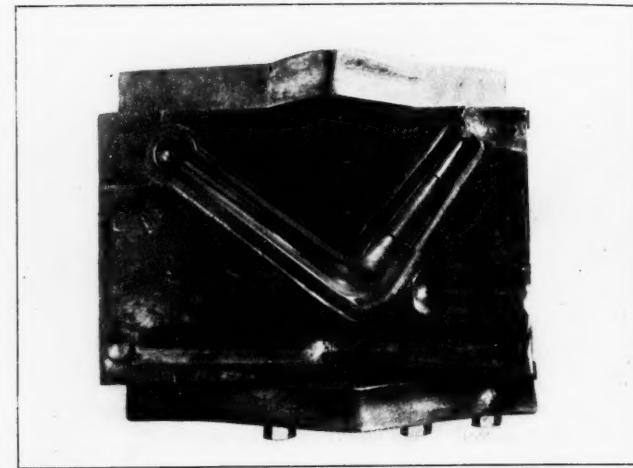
Drop Forging Die and Bending Die for Steering Gear Part.
